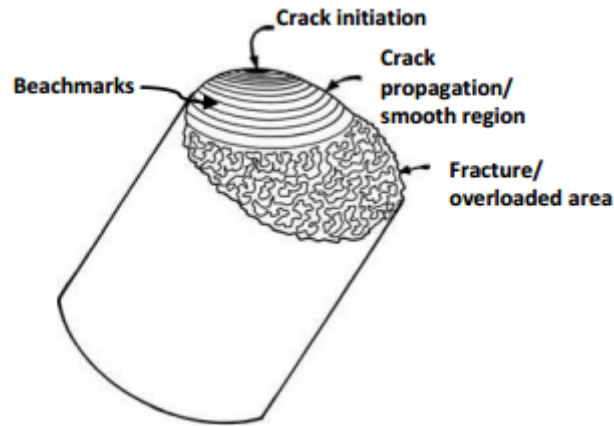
Fatigue fracture and its parts [3]
